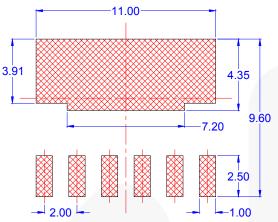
Land Pattern Design for Power88 Wave Soldering (in mm)
